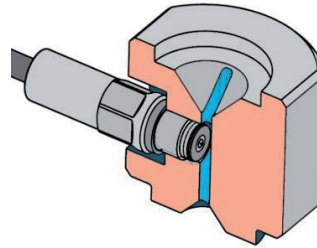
Schematic view of sensor Type 6613CG... installed in ring adapter
